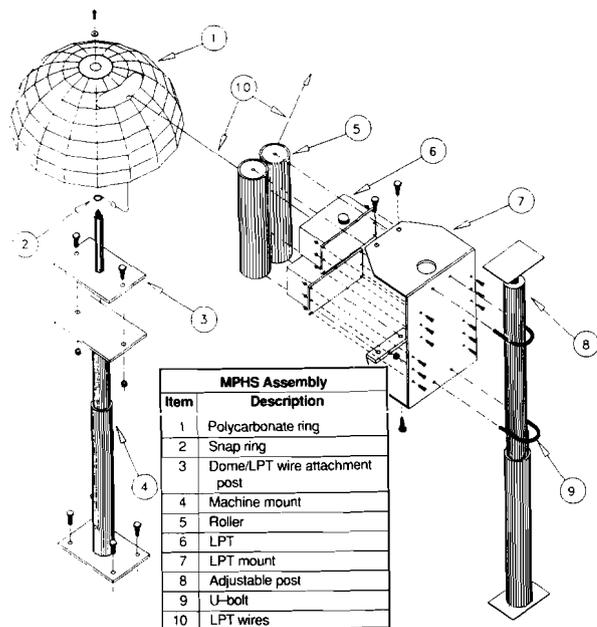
Assembly drawing of MPHS mount/post pair.
